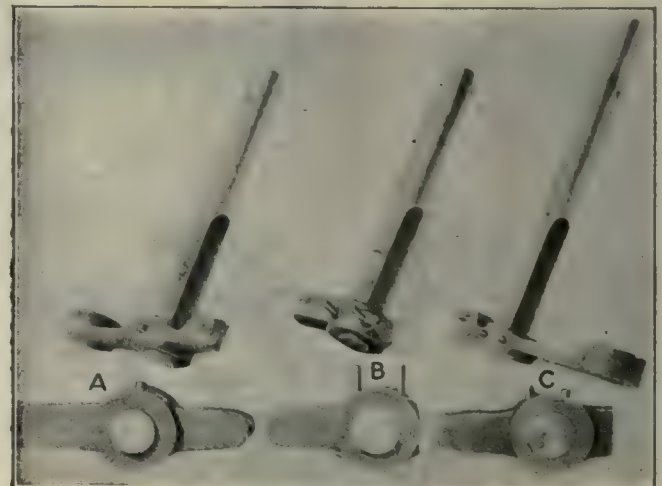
AND 2. DIAGRAM OF OPERATION AND TOOLHEAD FOR UNDERCUTTING SPARK-PLUG BOSS
